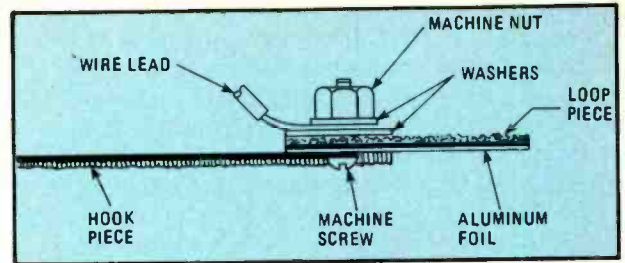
TO FASTEN, tighten the nut without turning the screw head. Do not tear the foil.
